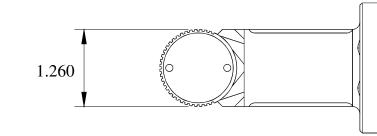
Hiac and Tool Center Point (TCP) Dimensions
